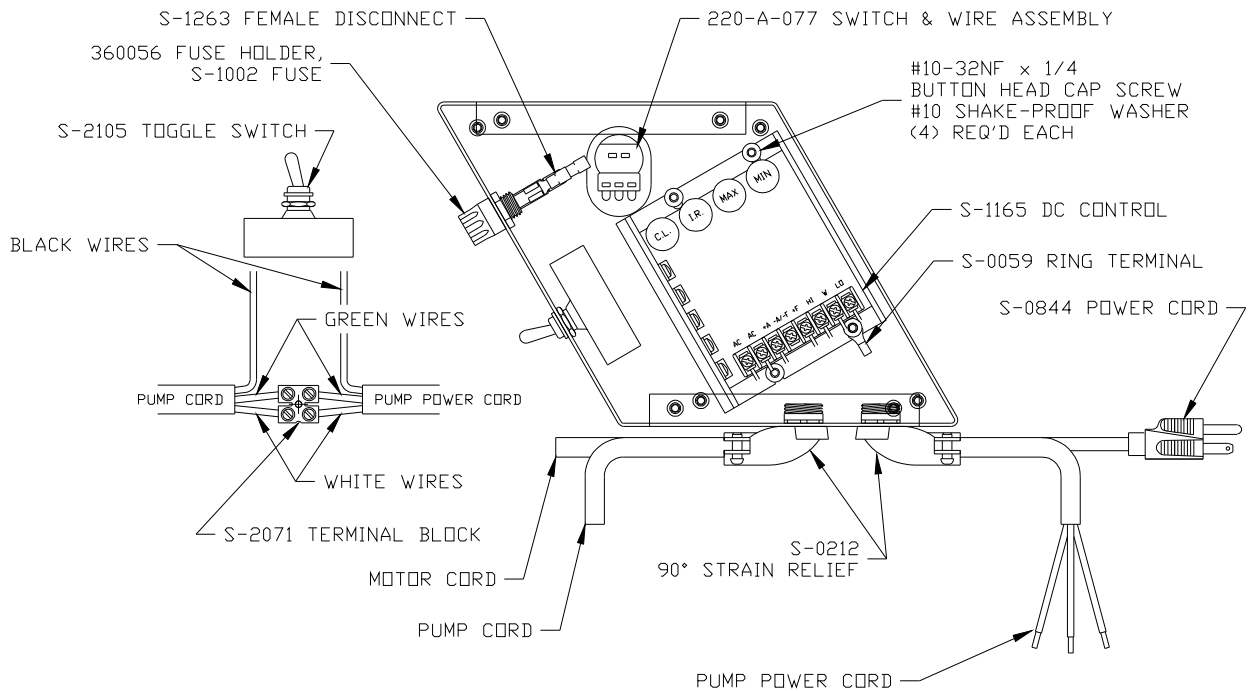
Fig. H Vacuum Power Switch Wiring (60Hz) Model B Perforators
